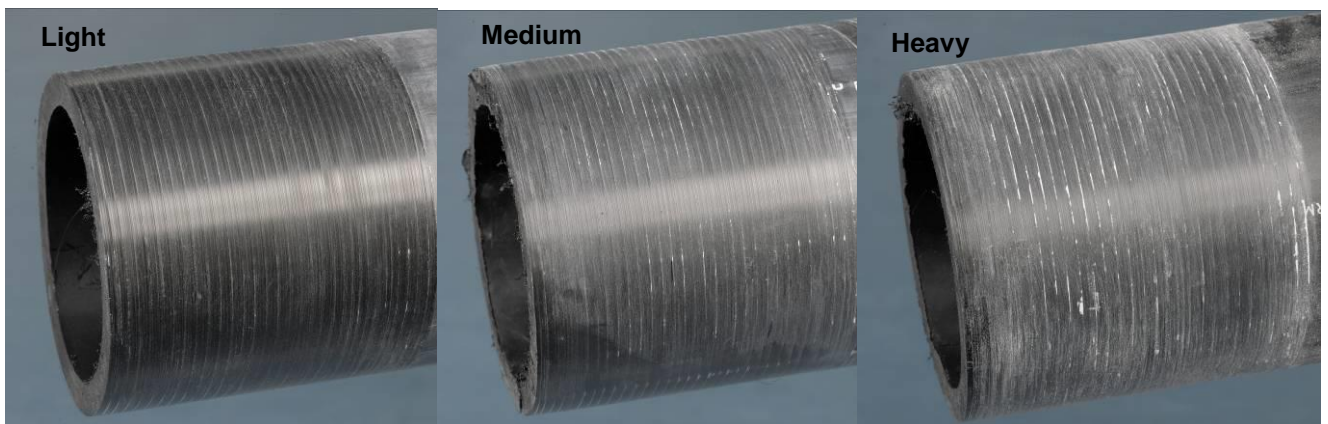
Standard talc-contaminated pipe samples for EF welding.
